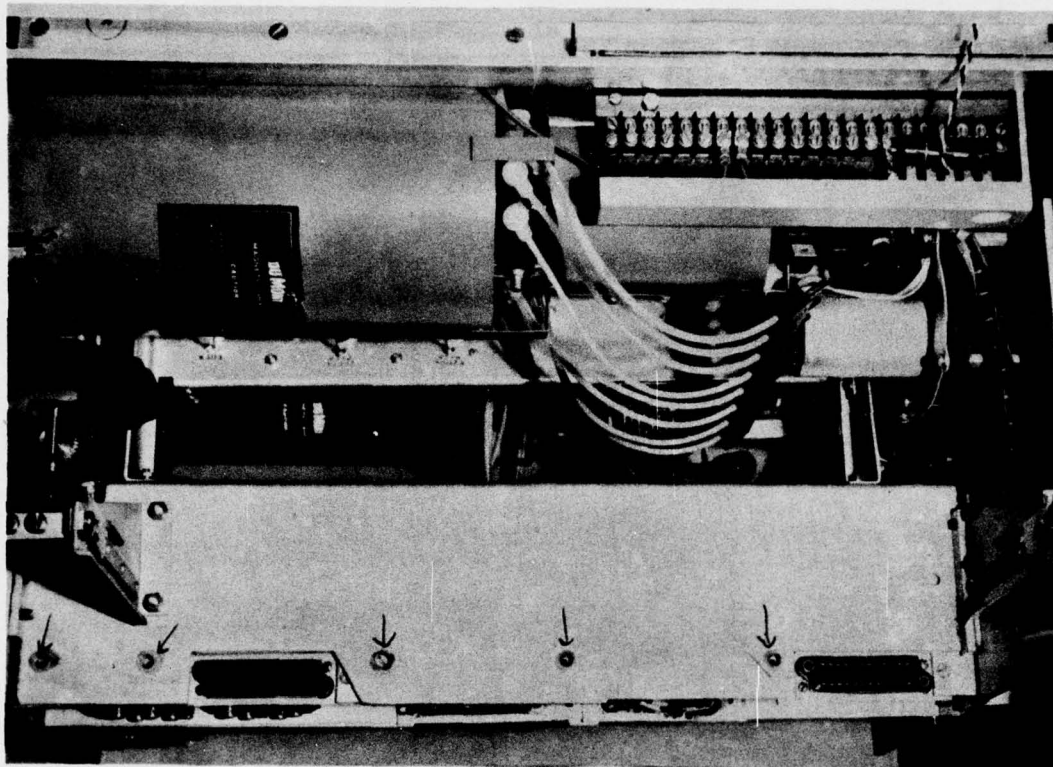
Right side of Analyzer unit showing screws which must be removed to drop transformer channel. (Left side of Analyzer is similar.)
